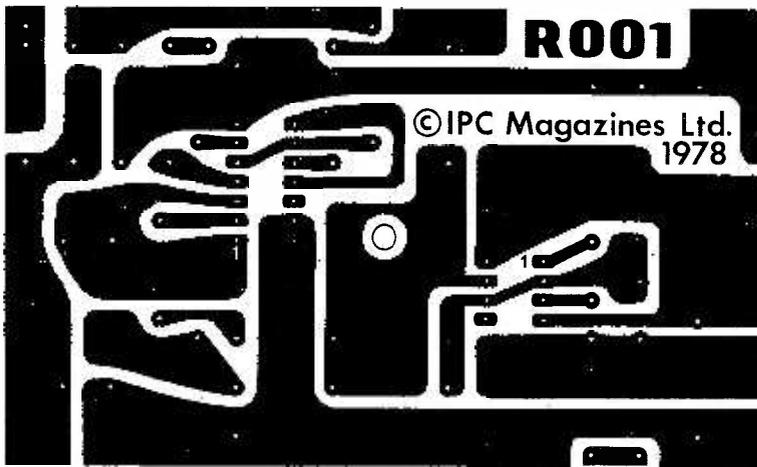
The PCB viewed on the copper side. This board is obtainable from the PW Readers' PCB service. Details page 825.
